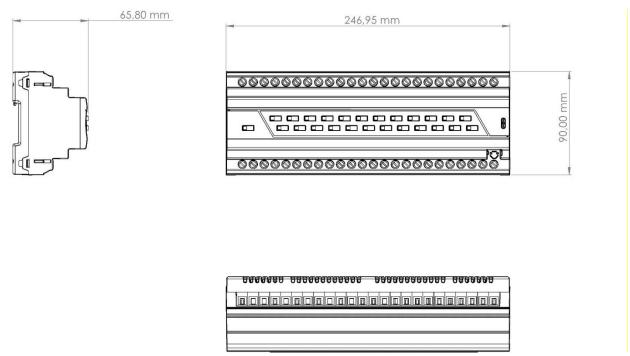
Dimensions of the Combo+ Actuator – 20/24 Channels
